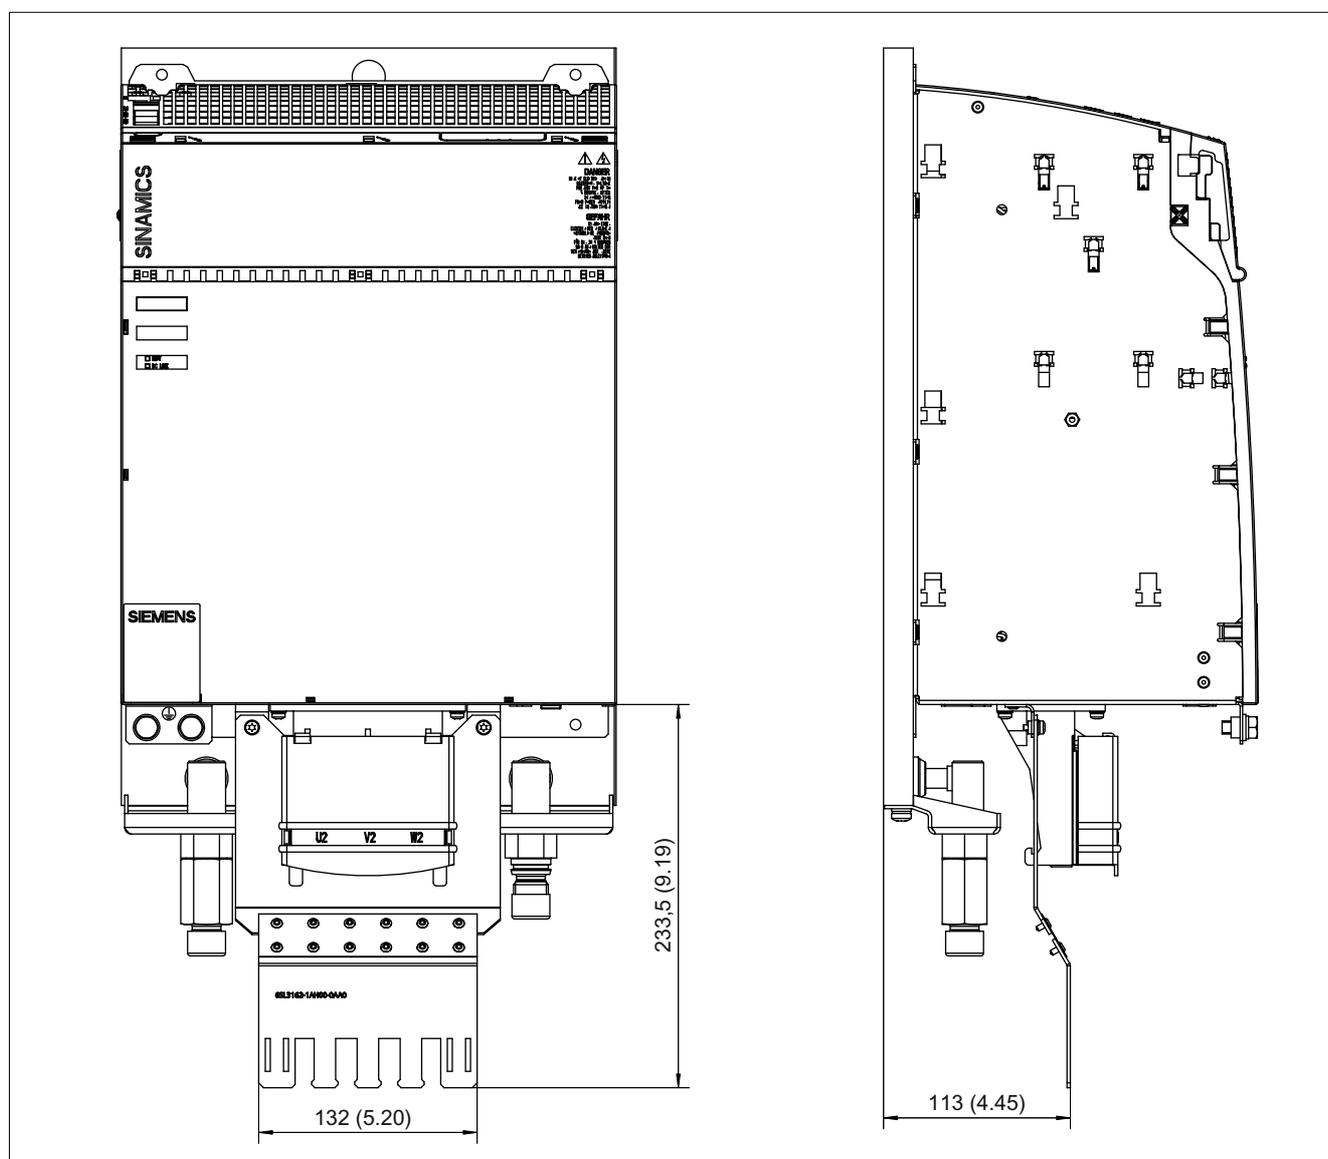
Dimension drawing of shield connecting plate on a 300 mm Liquid Cooled component, all dimensions in mm and (inches)
